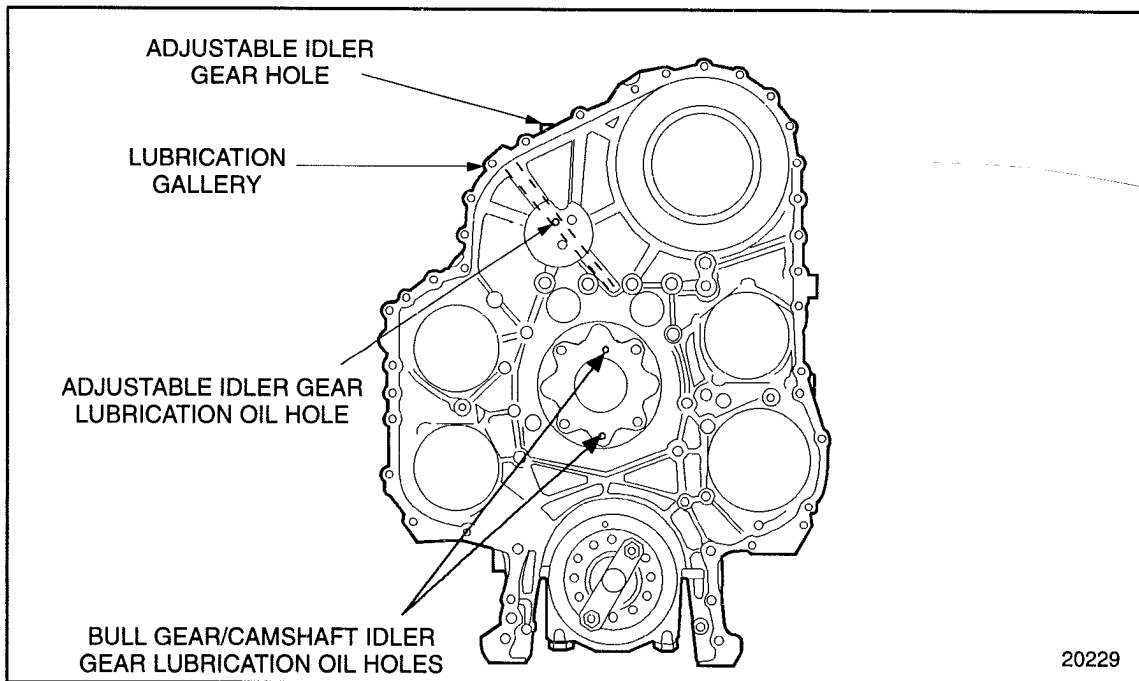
Gear Train Lubricating Oil Hole Locations
